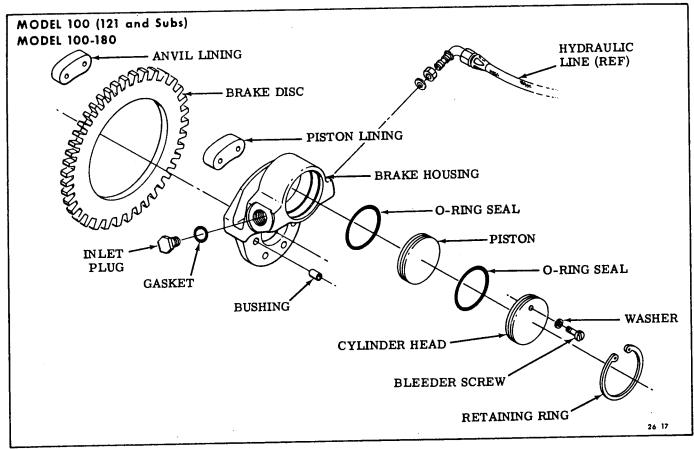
Brake Assembly (Aircraft 121 and Subs)
